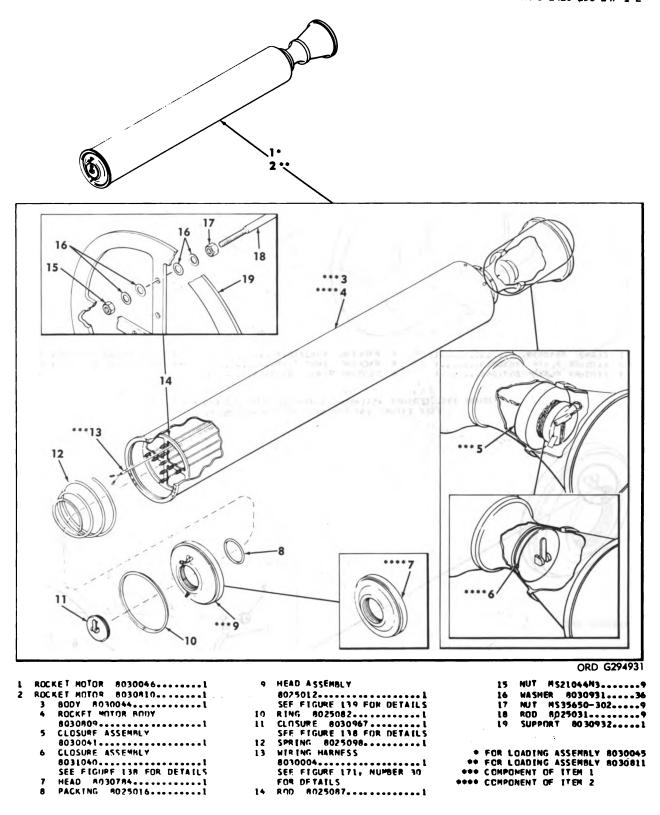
LOADING ASSEMBLY, ROCKET MOTOR /8030045 AND 8030811/ /SEE FIGURE 136 FOR NEXT HIGHER ASSEMBLY/
